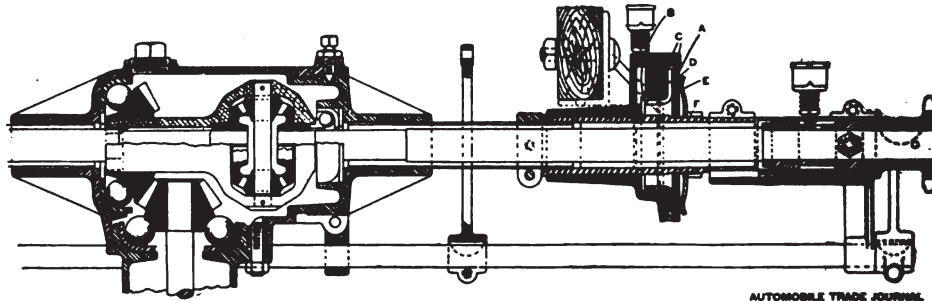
Brush Runabout jack shaft and differential assembly, showing large ball bearings and their adjustment, semi-floating sprocket shafts, and the details of the rear shock-absorbing radius rod attachment to the frame.
